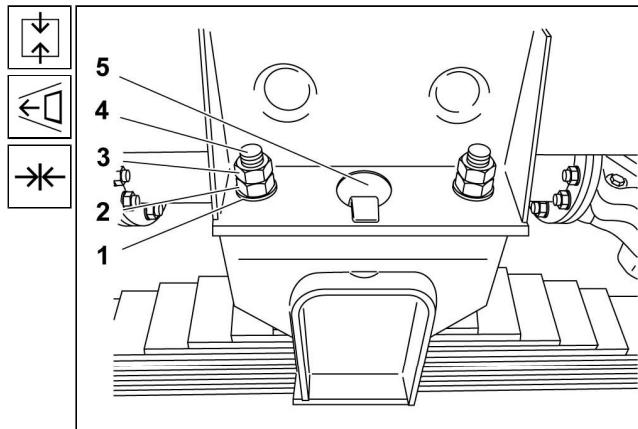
Attachment of frame to the cross girder of the rear connecting part
